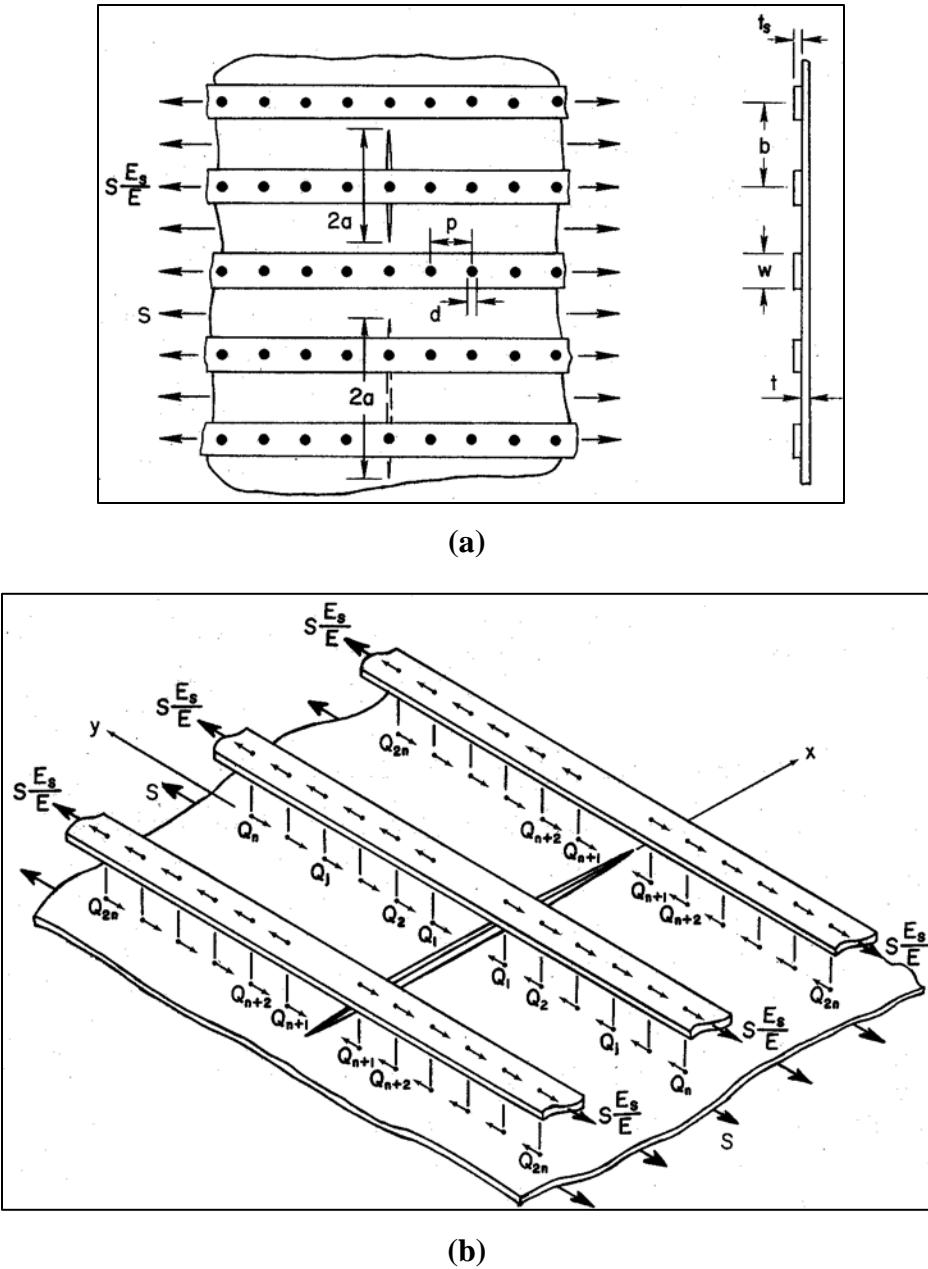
Crack in Large Riveted and Stiffened Panel under Remote Uniform Stress.
